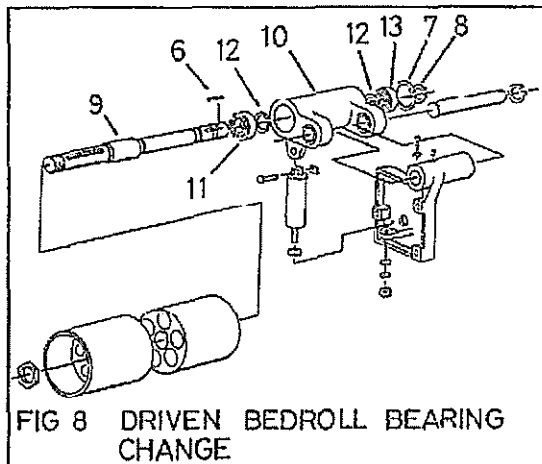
DRIVEN BEDROLL BEARING CHANGE
